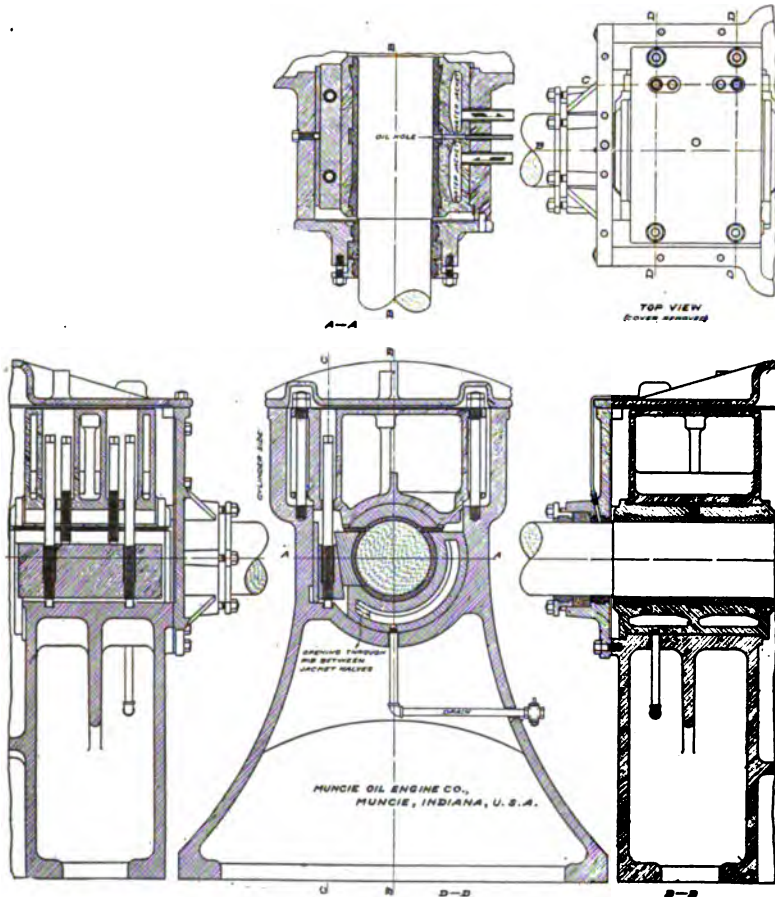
Muncie oil engine main bearing, quarter-box type.
